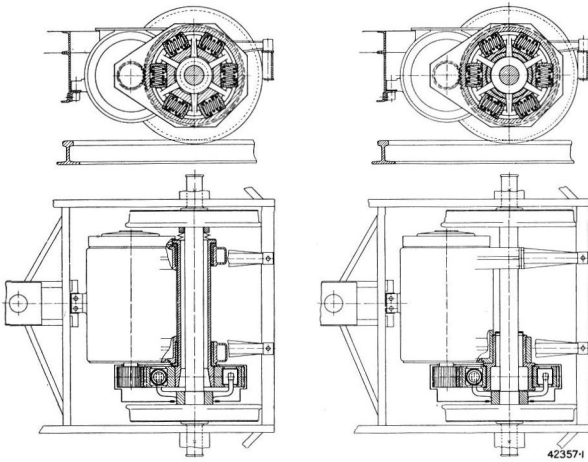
Brown Boveri spring drive; on left with quill; on right with short quill; driving motor rigidly mounted in bogie frame.
